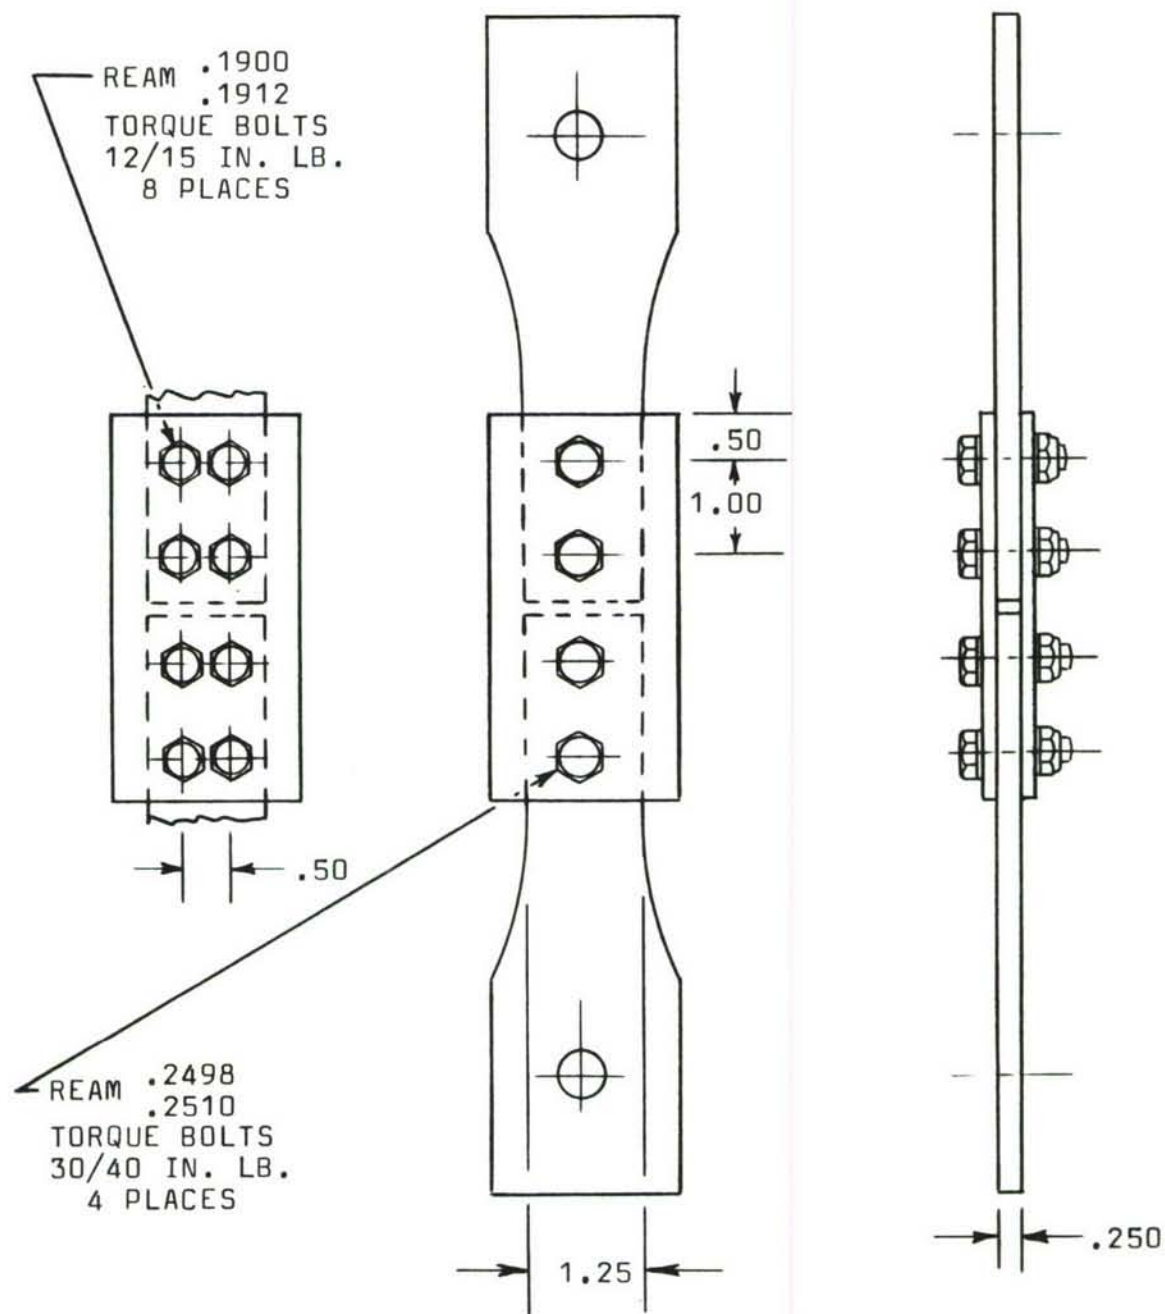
4 and 8 Bolt Joint Specimen Designs.
